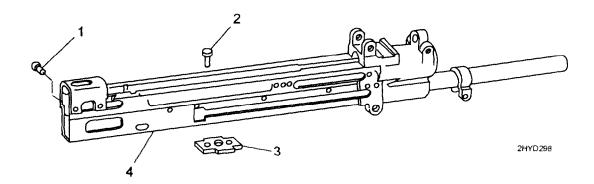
Group 16 Gun Receiver Assembly (M60D only), PN 11699805
